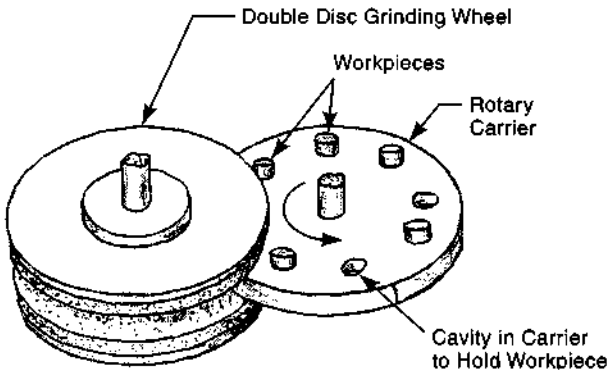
C7 Double disc grinding. Both the top and bottom surfaces of the workpiece are ground at the same time.
